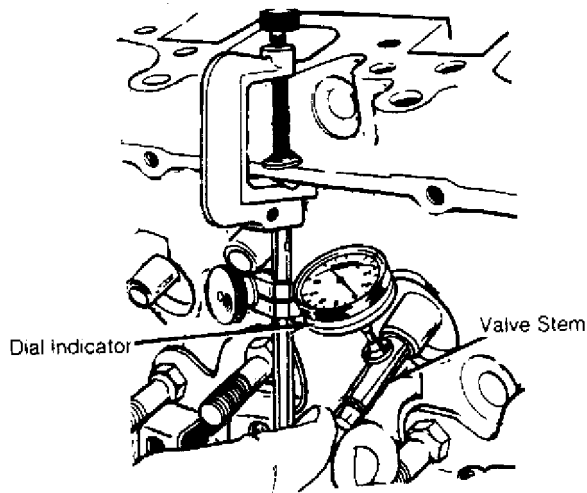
Measuring Valve Stem-to-Guide Clearance - Typical
